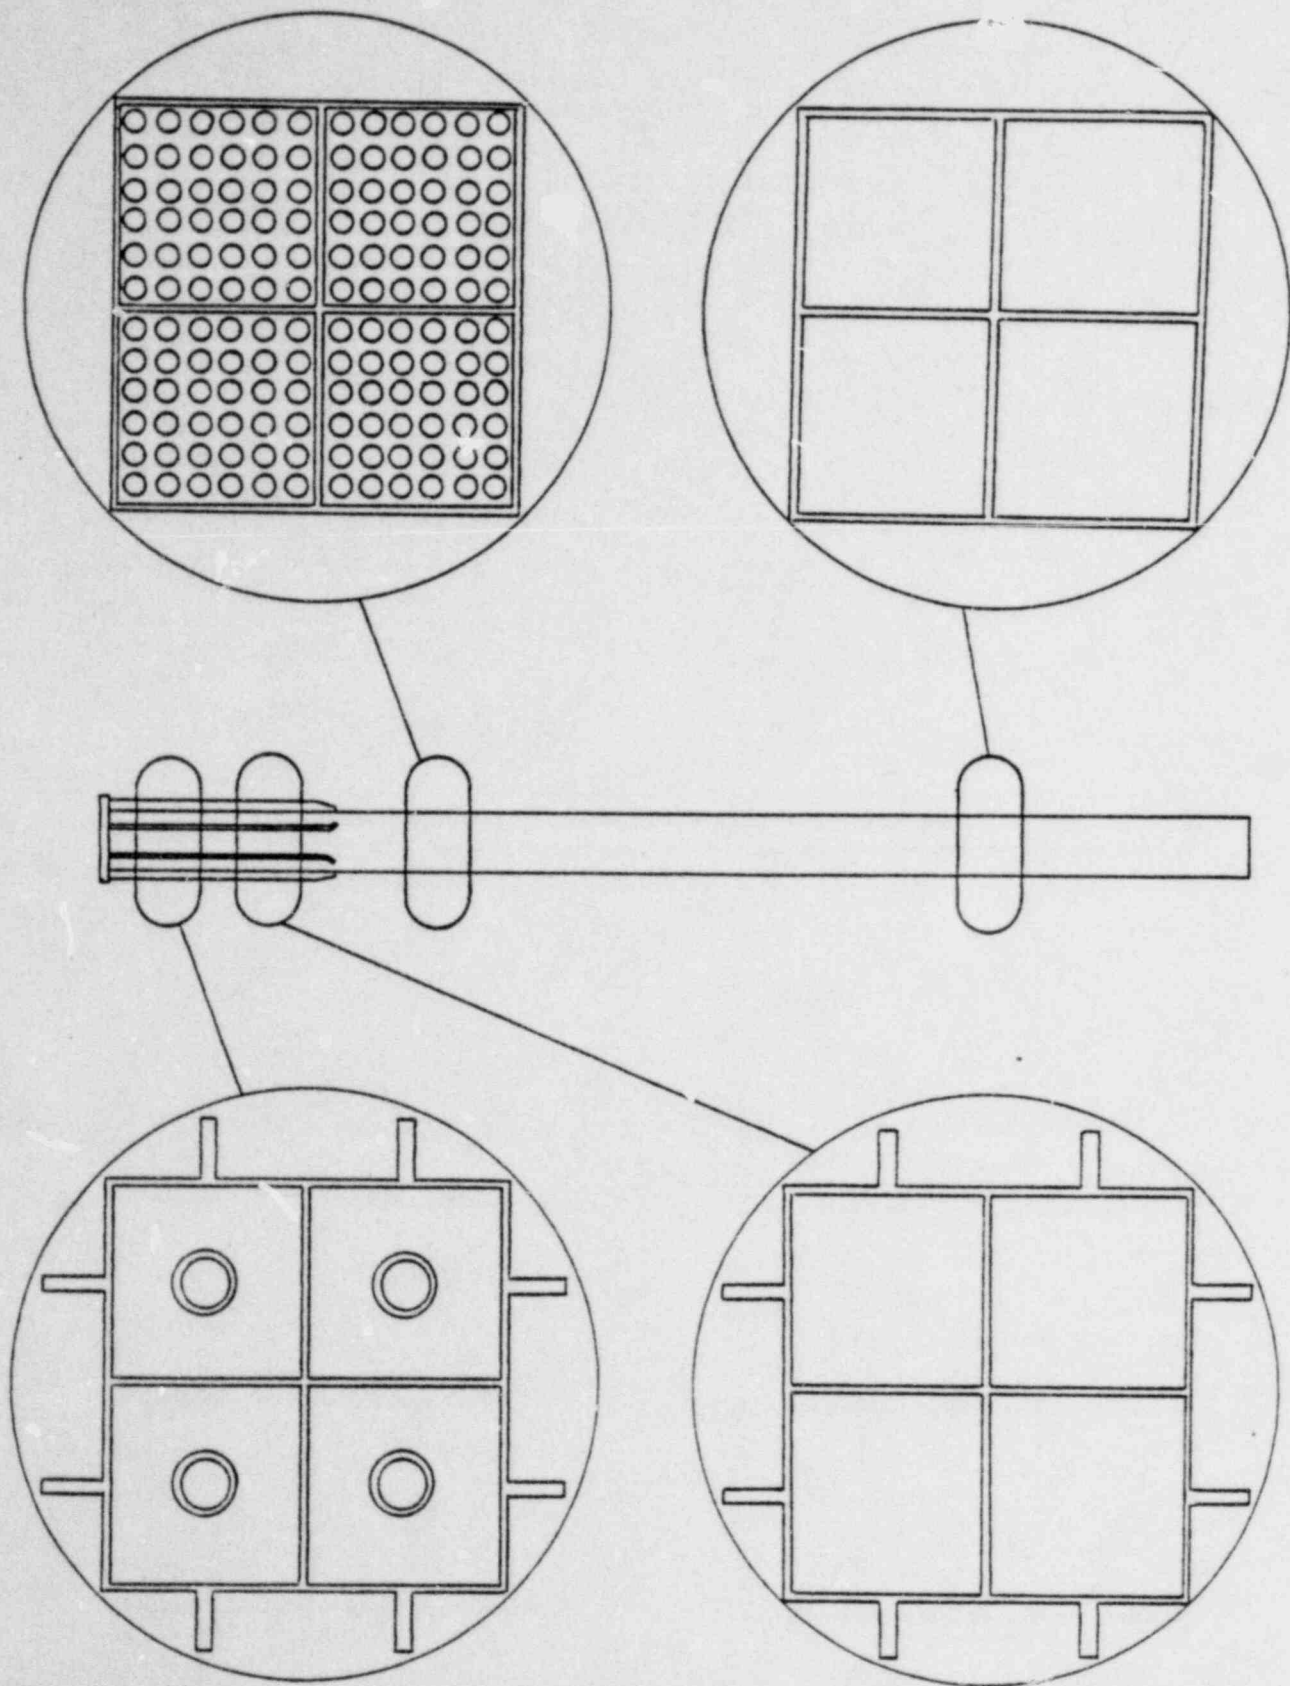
Fuel Assembly and Basket Configuration for Four BWR Fuel Assemblies
